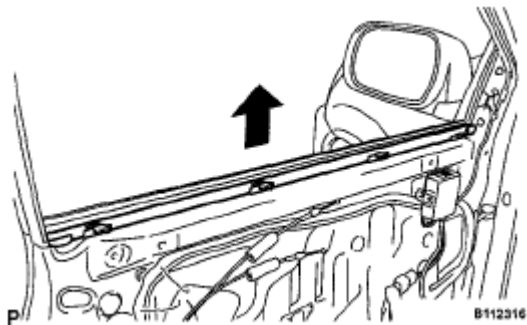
Removing Front Door Glass Weatherstrip Inner
